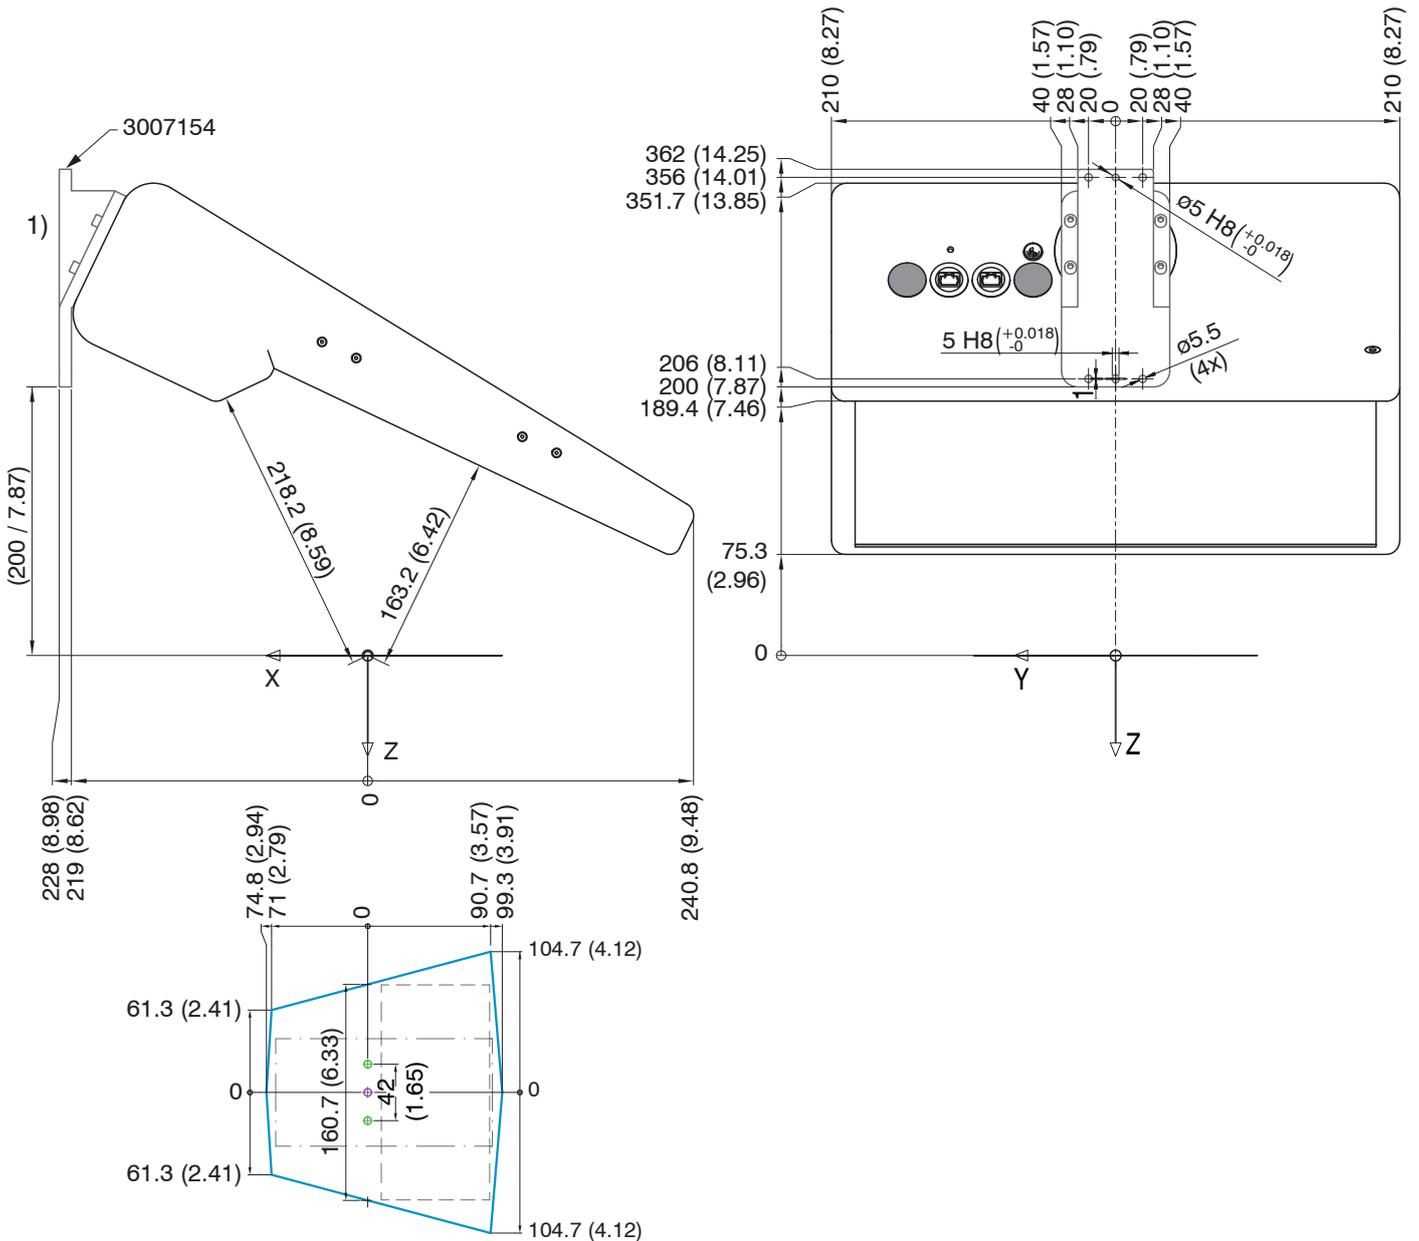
Dimensional drawing of RCS130-160 measuring system with measuring window
